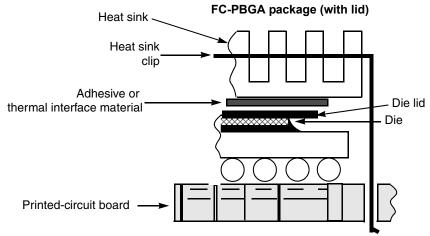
Package Exploded Cross-Sectional View—FC-PBGA (with Lid) Package
